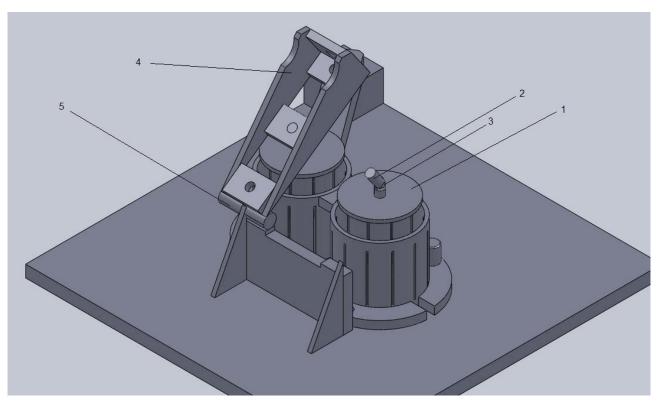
Filling device of piston press for briquettes from tobacco residues: 1 - piston; 2 - arm; 3 - hinge joint; 4 - retainer; 5 - support
